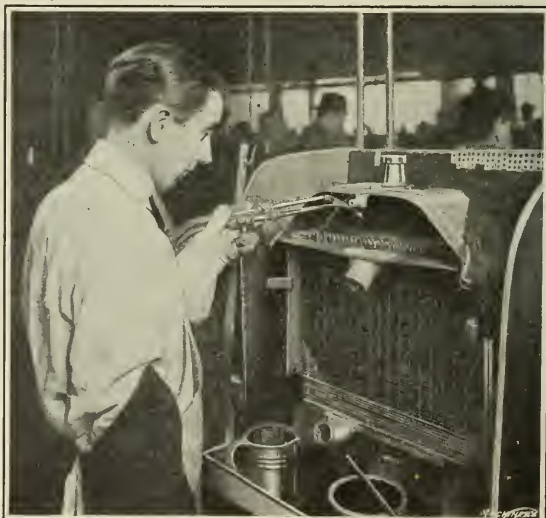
Soldering Vertical Tubes in Water Chambers of Ford Radiators
